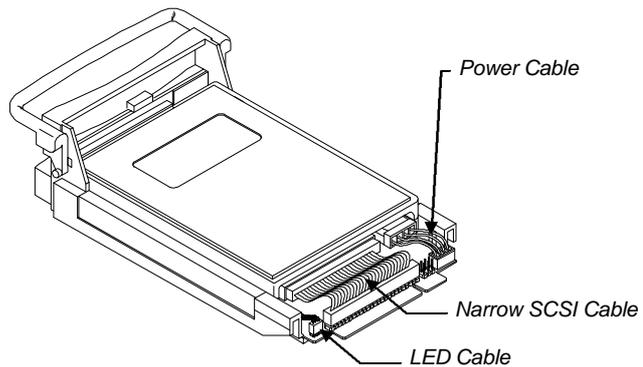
Connecting the Drive Cables (Narrow SCSI Drive)
